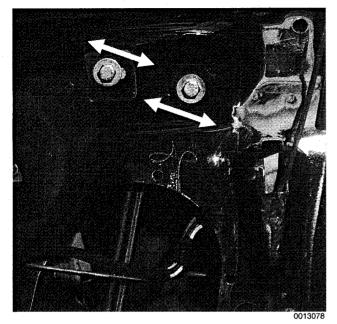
Move window fore/aft at rear guide rail top mounting bolts (arrows).
